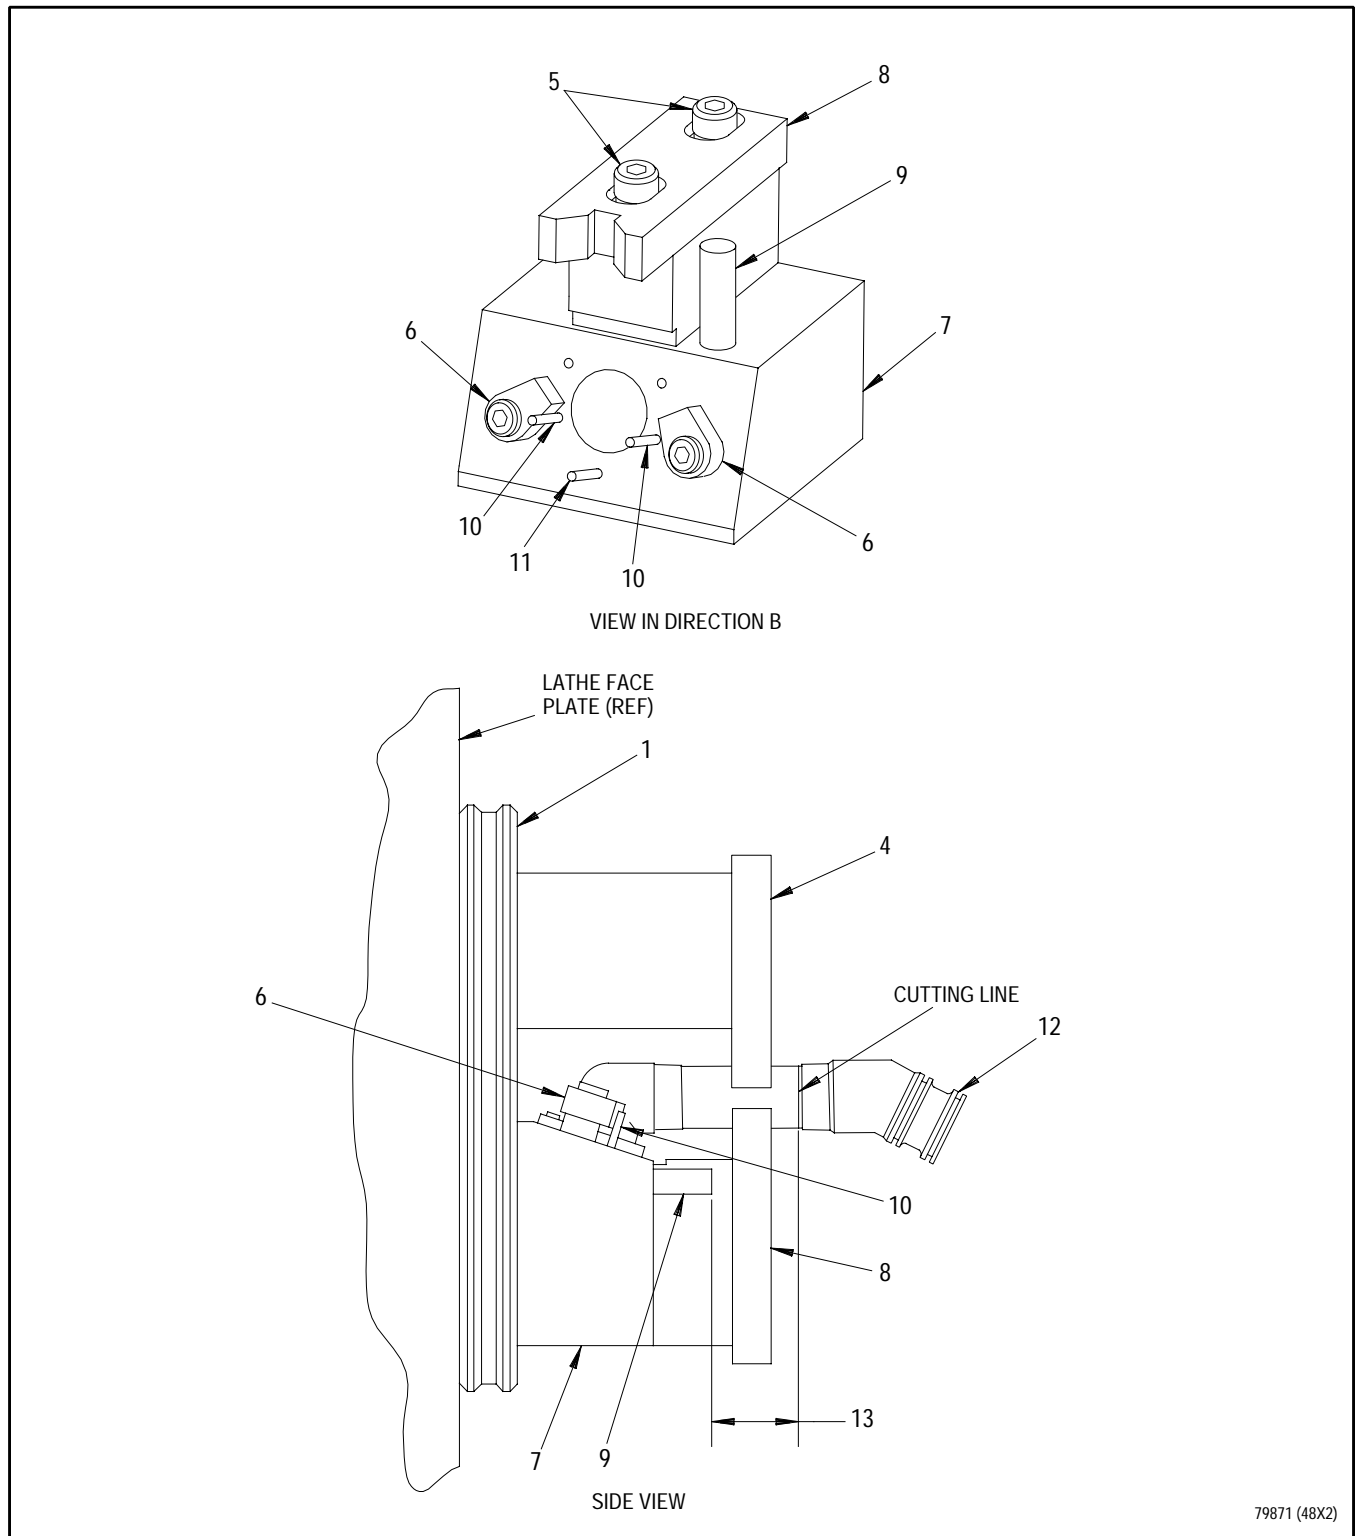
No. 4 Bearing Air Supply Tube Assembly - PWA 71485 Machining Fixture Installation
